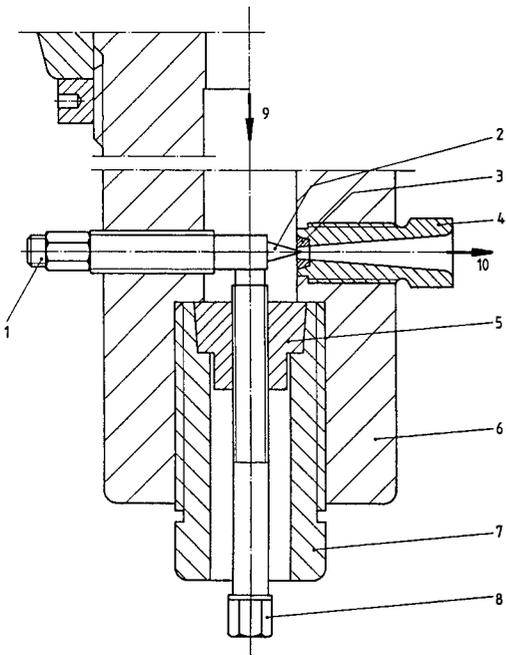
Extrusion tooling for the extrusion of hollow solder. 1, connection to the flux container; 2, hollow mandrel; 3, extrusion die; 4, extrusion die holder; 5, pressure nut; 6, one-piece die head with the container; 7, front nut; 8, hollow mandrel screw adjustment; 9, extrusion stem direction during extrusion; 10, direction of extruded product (Source: Collin)
